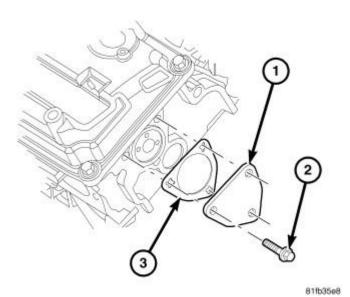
Camshaft, Rocker Arm Assembly & Cylinder Head Courtesy of CHRYSLER LLC
